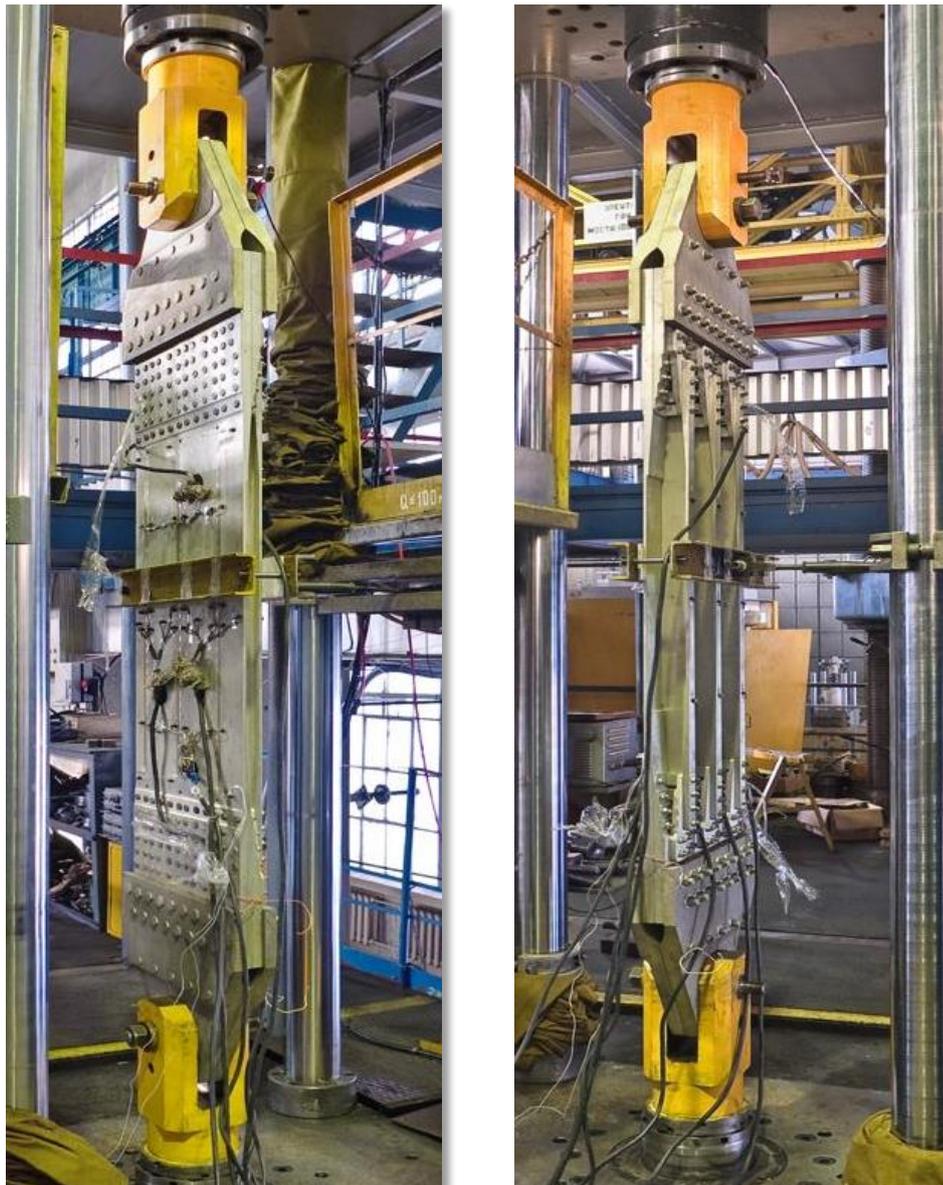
Fatigue tests of "3-stringer" panel specimens representing wing structure of IL-76MD-90A aircraft
